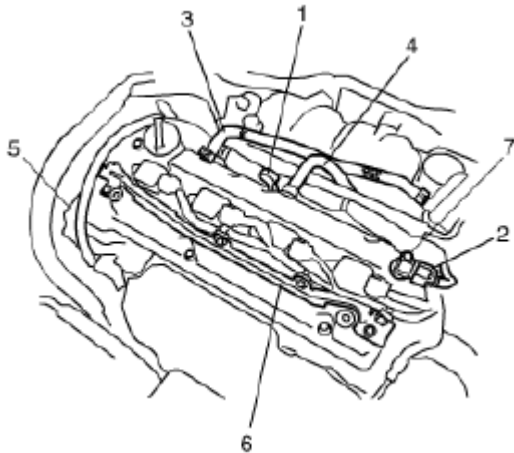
Identifying Oil Level Gauge Breather Hose & PCV Hose
